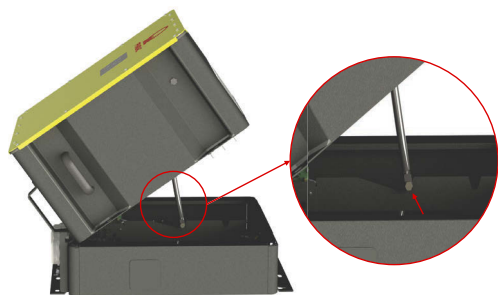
Supporting the hydraulic damper in the recess of the Connection Box for horizontal installation
